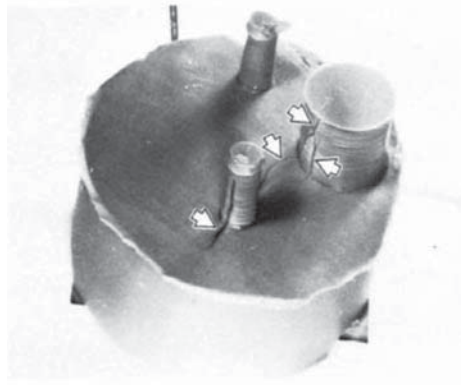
MAGNETIC SLURRY INDICATIONS OF SURFACE CRACKS IN WELDMENT (PRODUCED BY YOKE
